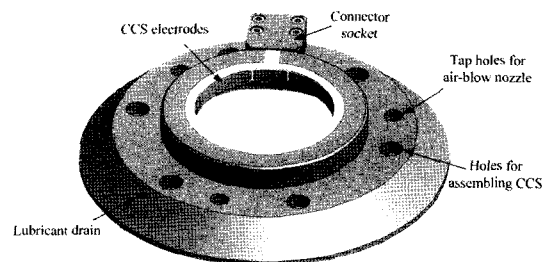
Cylindrical capacitive sensor as a replacement part for milling spindle cover
